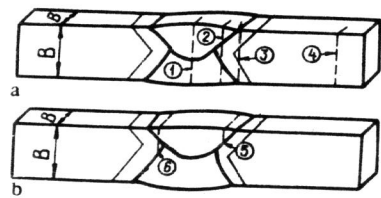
Studied zones of the welded joints (1-6) in case of fracture propagation along the weld (a) and through the thickness (b).
